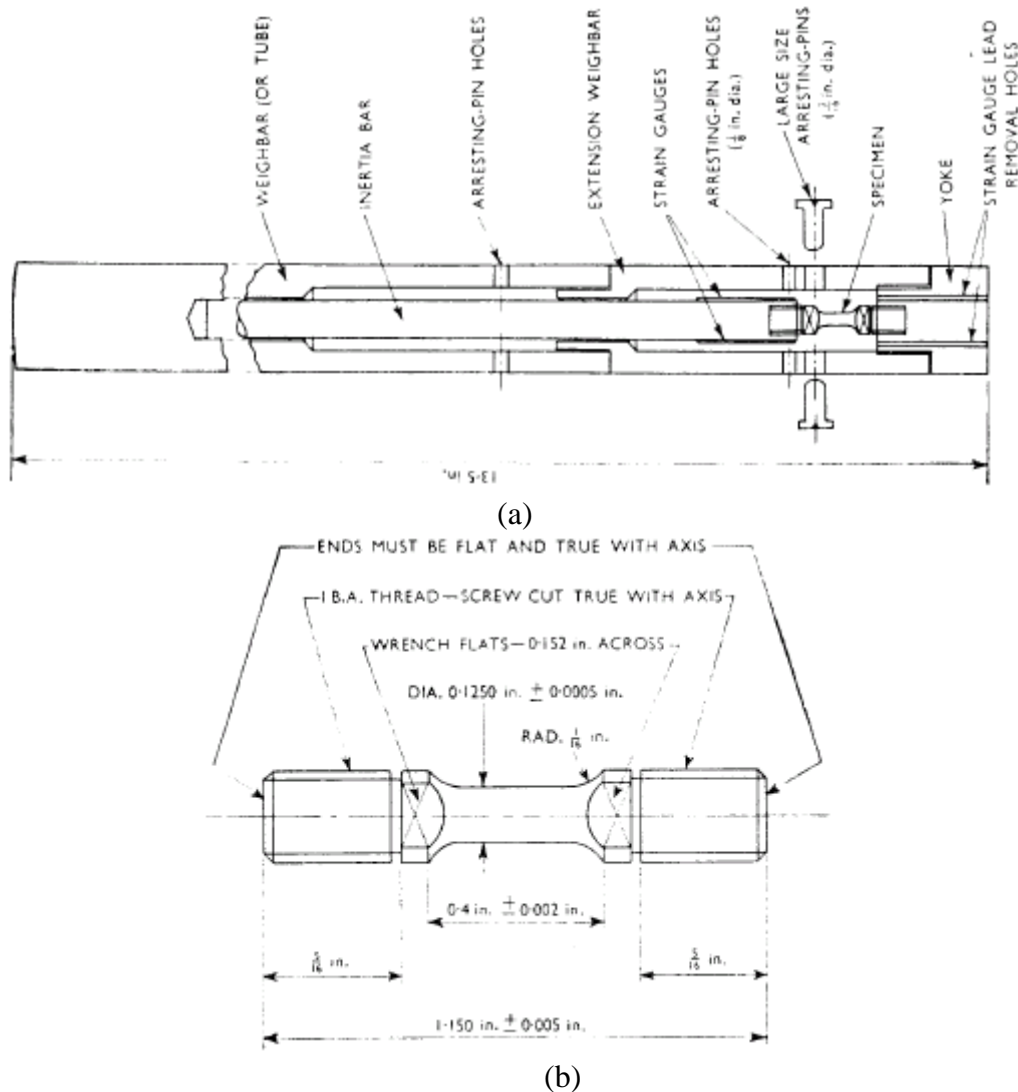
Tensile test set-up using tubular compression bar surrounding the traditional SHPB (a) specimen compression-bar assembly, and (b) test specimen [3]
